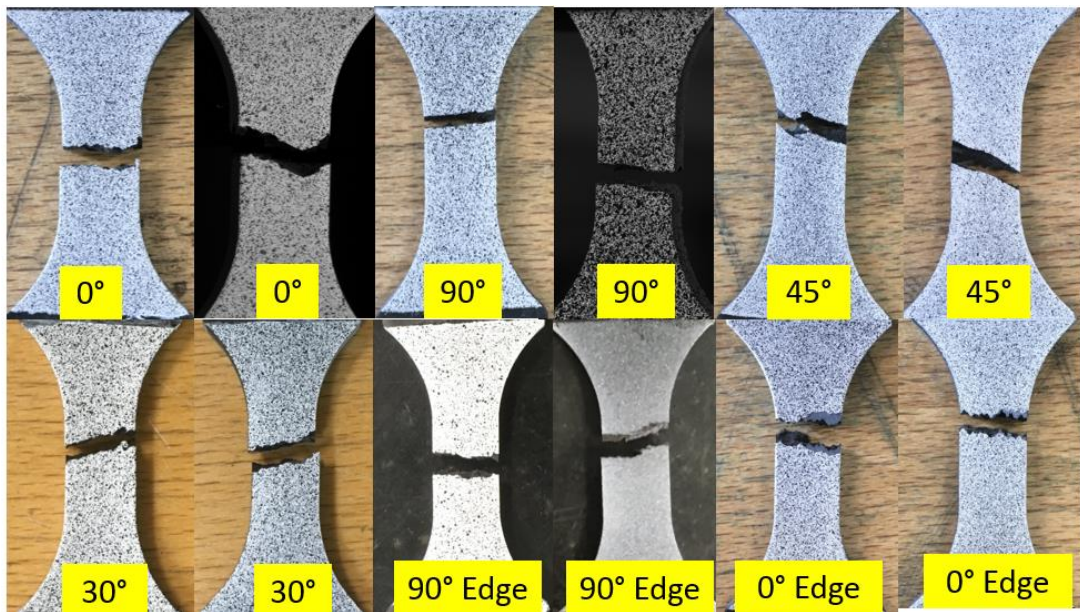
Visual inspection of failure plane for tensile specimens.
